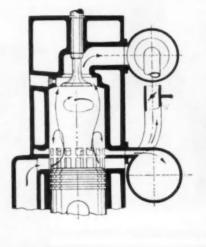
The scavenging system is illustrated in this sectional view of an experimental water cooled cylinder.
